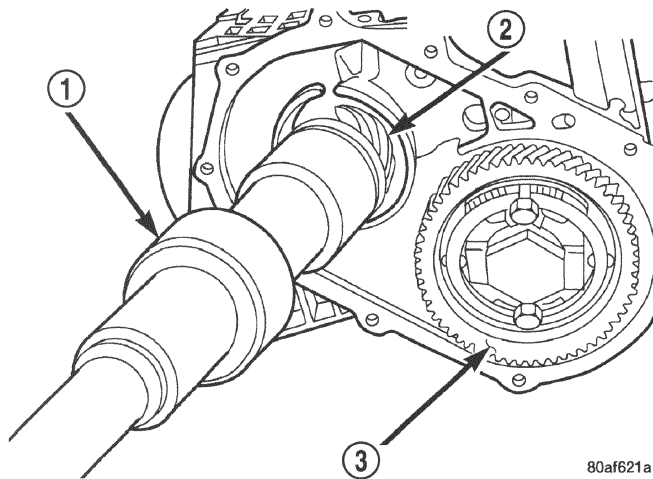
Remove Transfer Shaft Bearing Snap Ring
